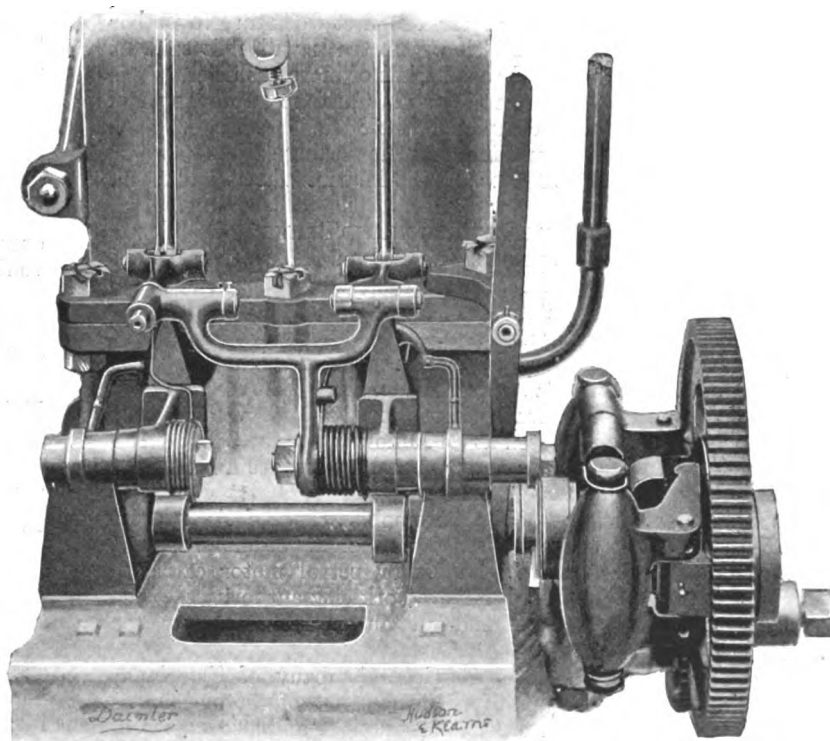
VIEW OF GOVERNOR AND EXHAUST-VALVE MOTION.
